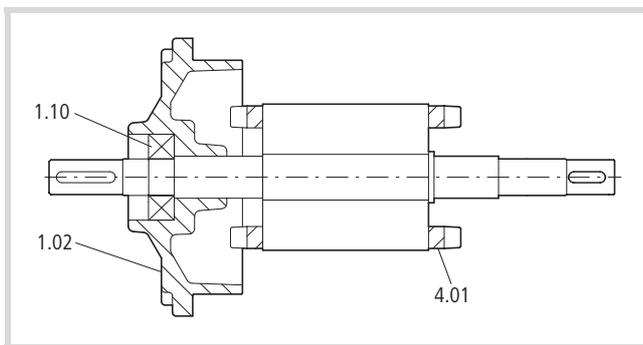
Rotor (4.01) with DE roller bearing (1.10) and DE end shield (1.02)
